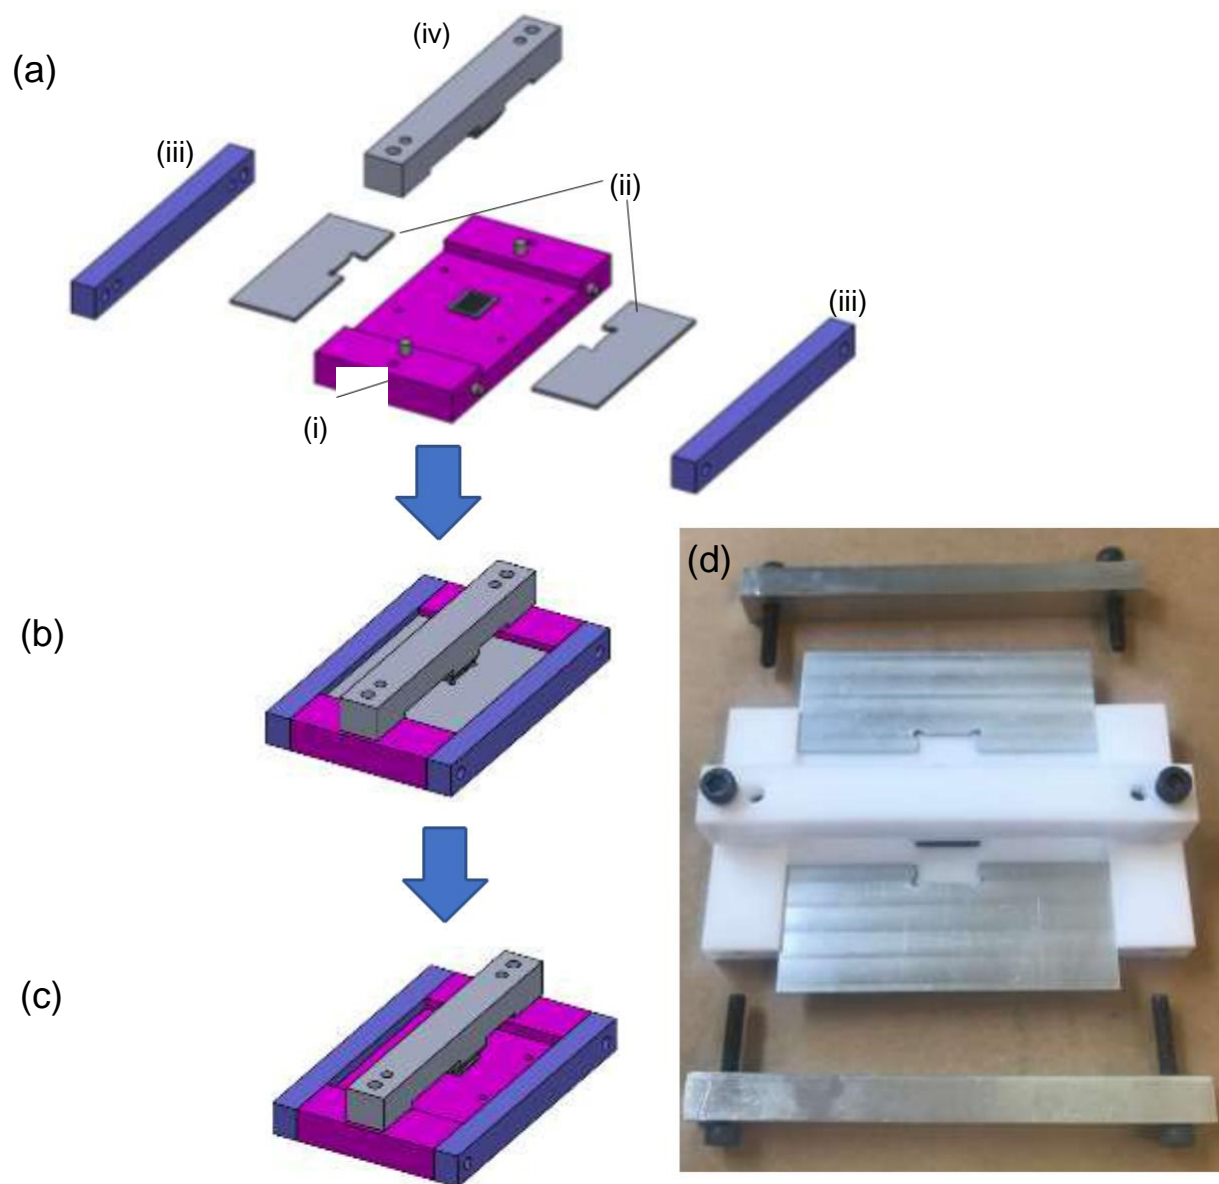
ATR alignment jig for fabrication of the ATR sensing layer. Computer aided design renderings of: (a) exploded view showing (i) jig baseplate (pink) with ATR crystal placed sensing side down (grey), (ii) guiding plates, (iii) connecting sidebars and (iv) ATR immobilizing arm and Teflon plug with tapered edges. CAD of (b) the assembled view of jig
